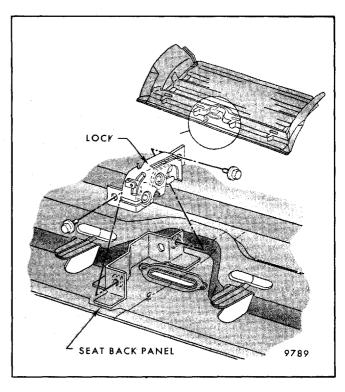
Folding Second Seat Back Lock Installation - A Styles
